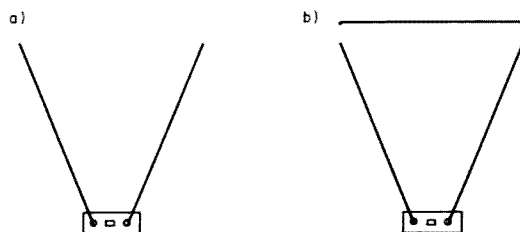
With eyes formed in the ends of the horizontal pieces, they are attached to the ends of the outside elements, which were flattened and drilled earlier.
